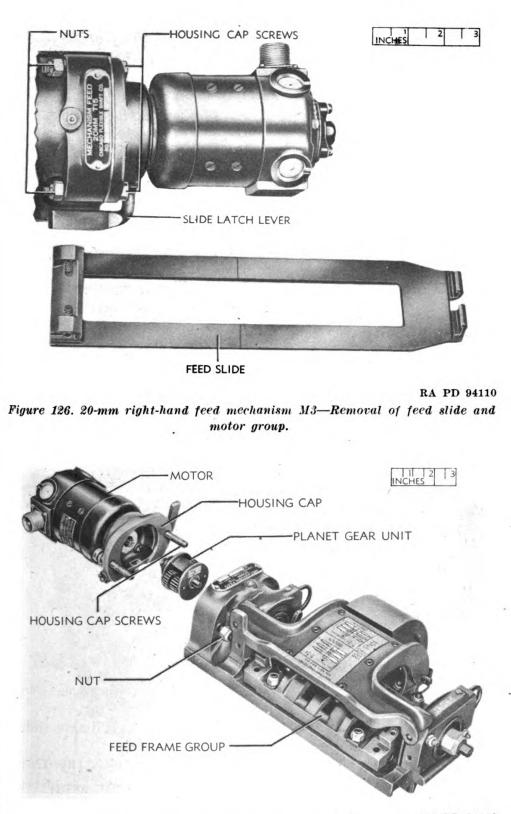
20-mm right-hand feed mechanism M3—Motor, planet gear unit, and feed frame group.
